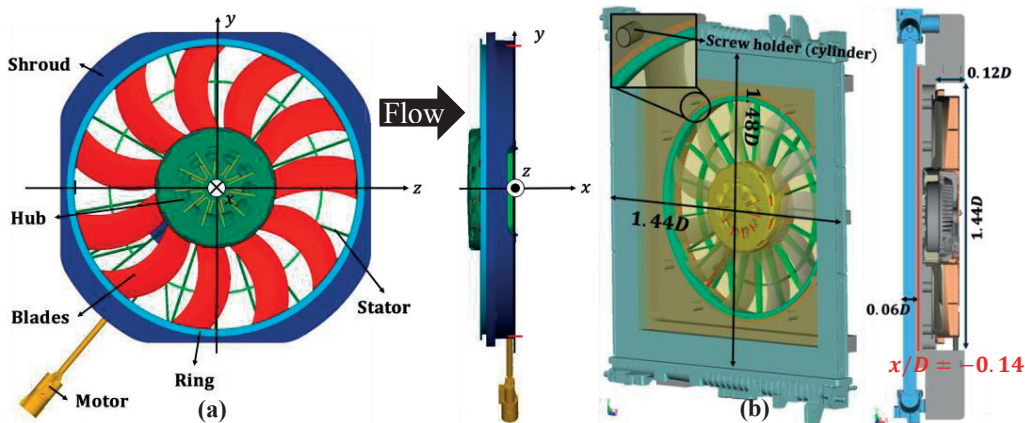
Tested engine cooling module parts. (a): Fan. (b): Radiator.
